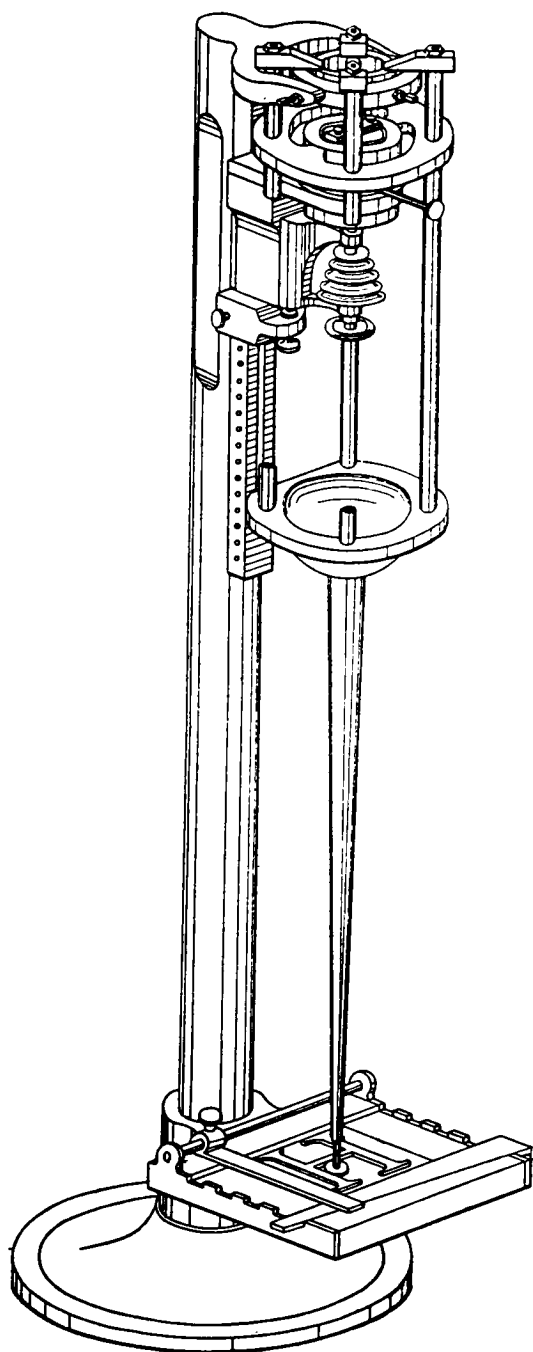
Original Benton punch-cutting machine from patent specification, 1885. (Typographical Printing Surfaces, page 196.)
